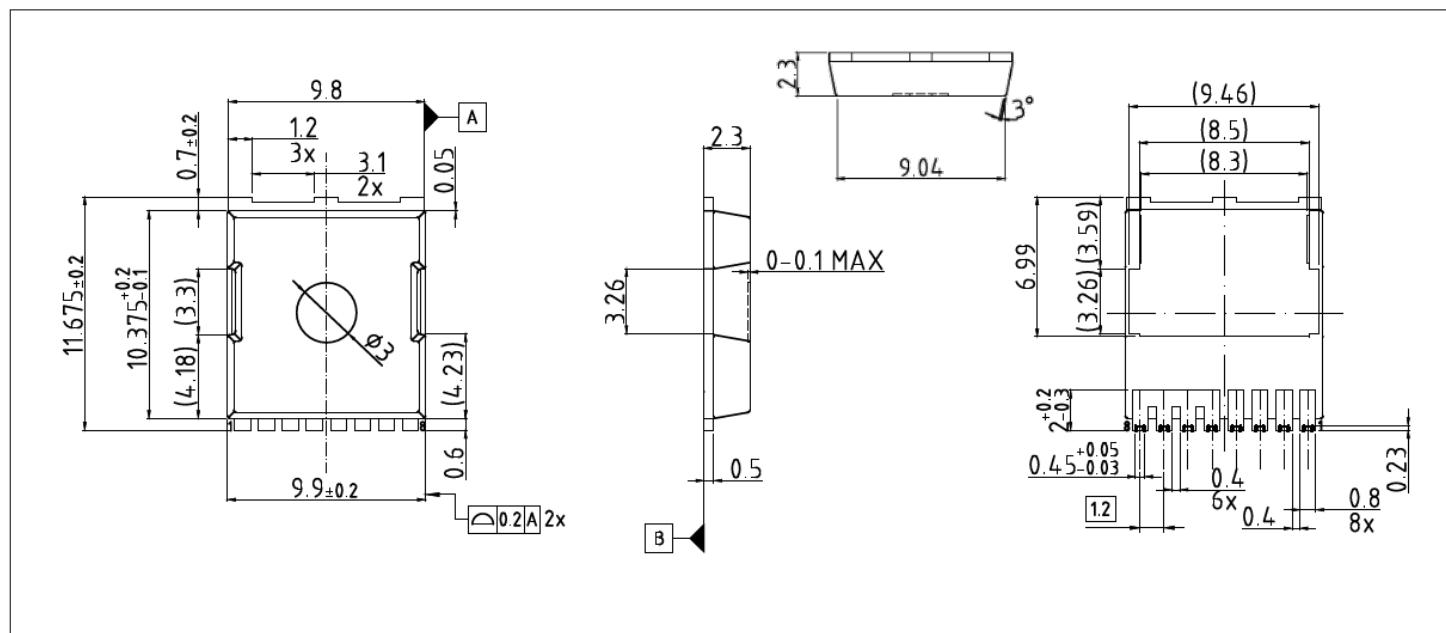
PG-HSOF-8 (8-pin TO-Leadless) package dimensions
